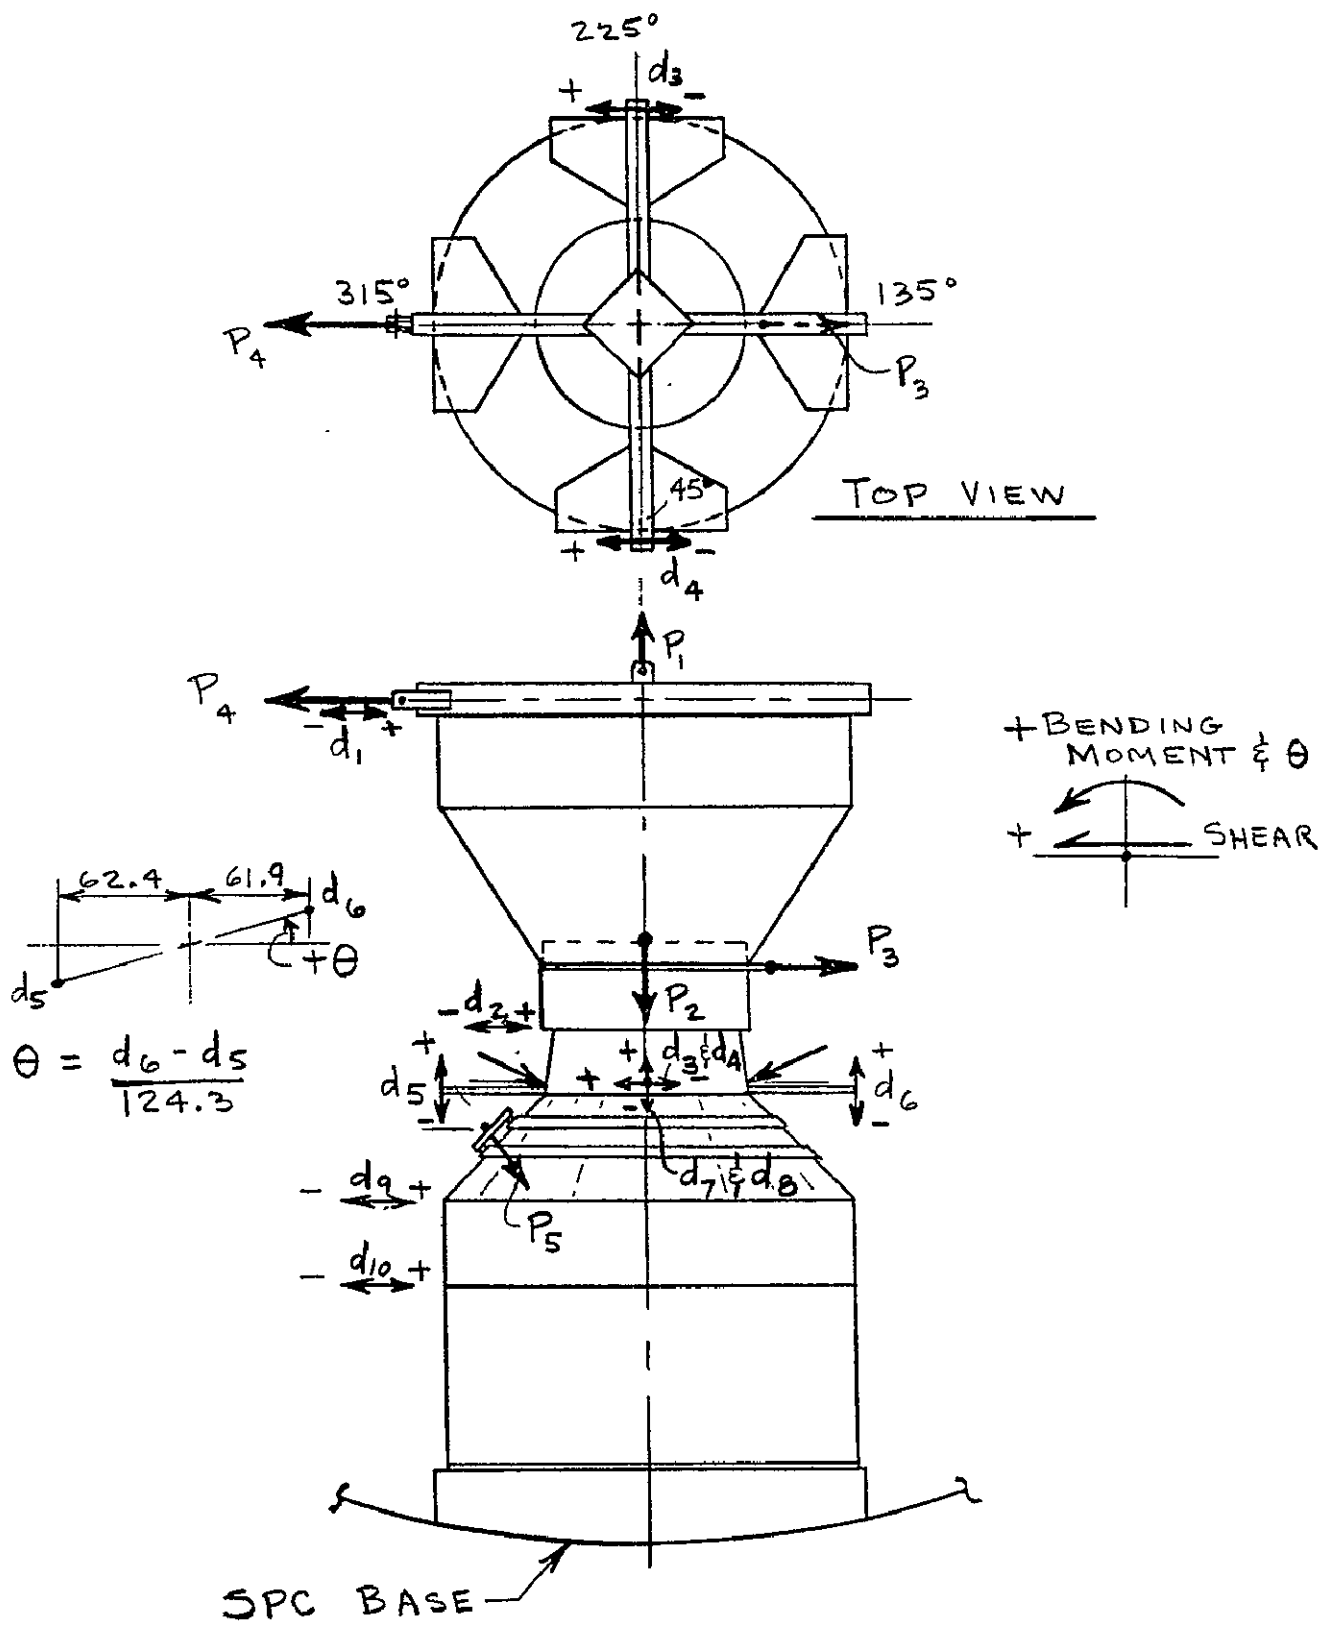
FIGURE II EQUIPMENT MODULE TEST WITH INTELSAT IV ADAPTER SHOWING DEFLECTOMETER LOCATIONS
